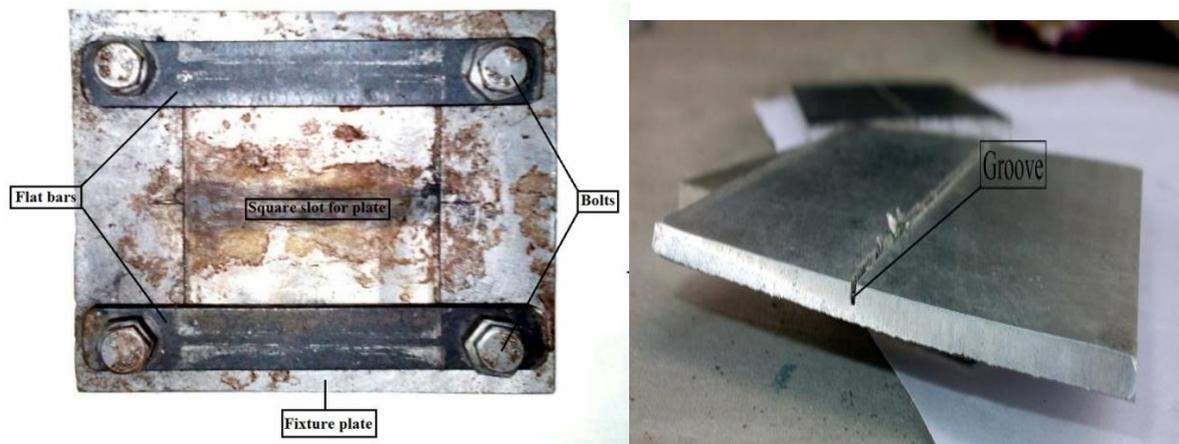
Fixture for hold the square plate and plate of Al 5251 alloy with a groove for filling of reinforcement
